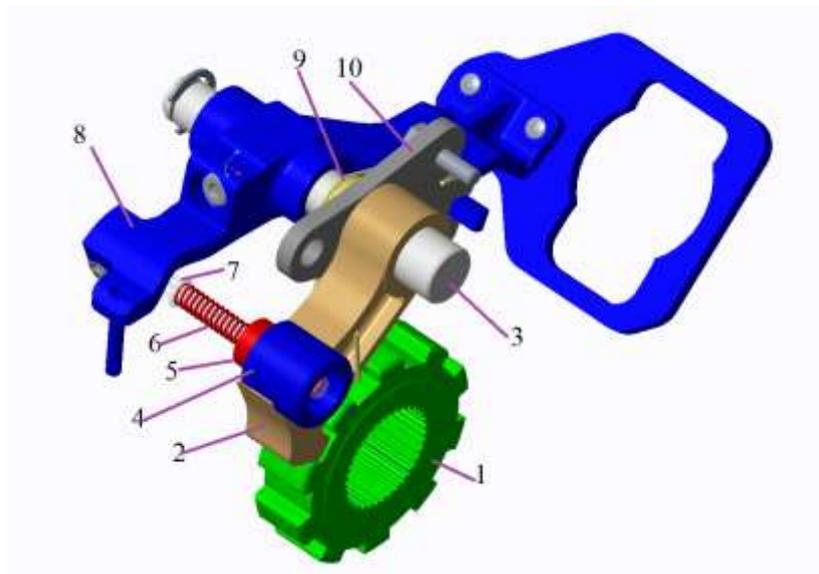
Park lock mechanism, (1) ratchet wheel, (2) pawl, (3) shaft, (4) guide block, (5) cone, (6) actuator spring, (7) actuator rod, (8) fork, (9) return spring, (10) bracket.
